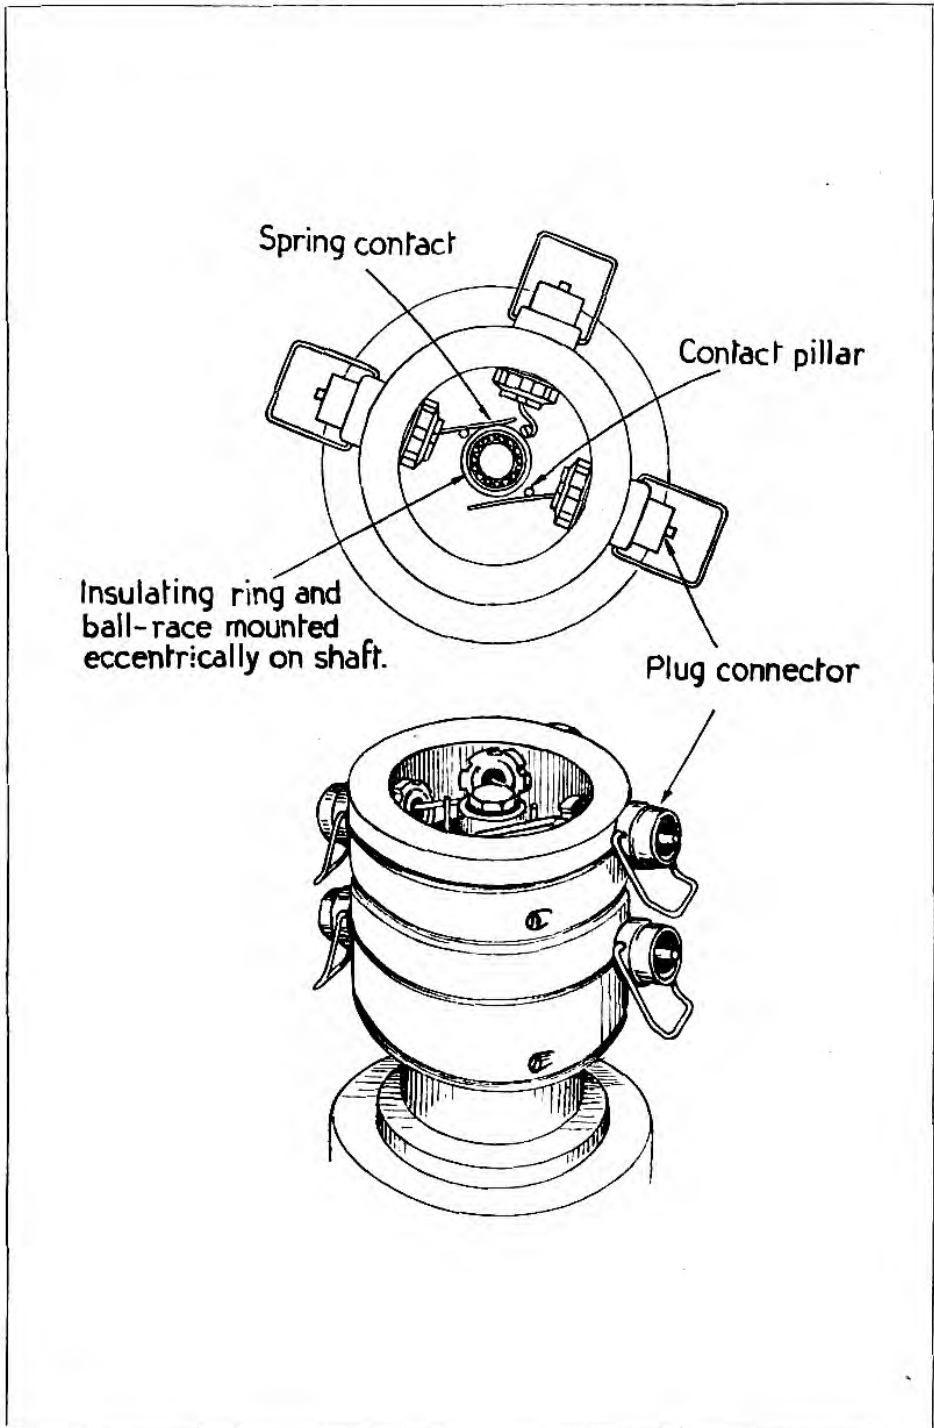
Detailed drawing showing essential components of Switching Motor.
